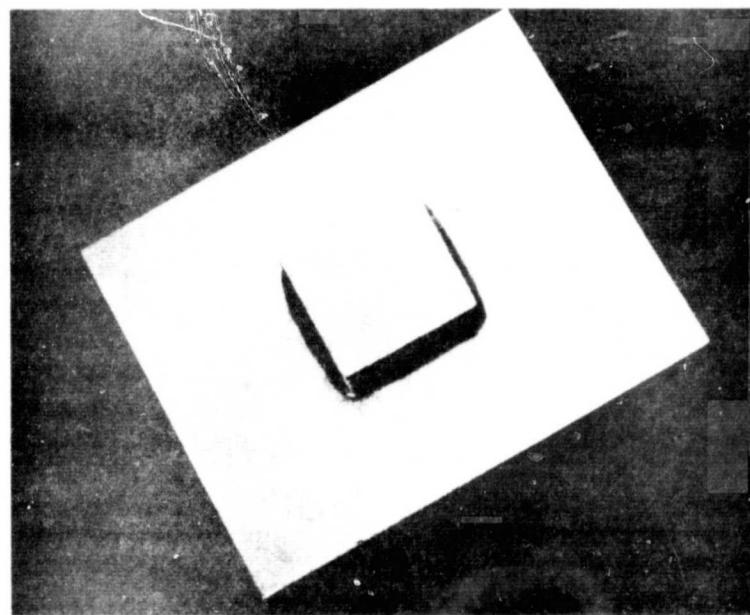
Aluminum Tab With 1.27 cm (1/2 inch) Square Package Mounted on it
